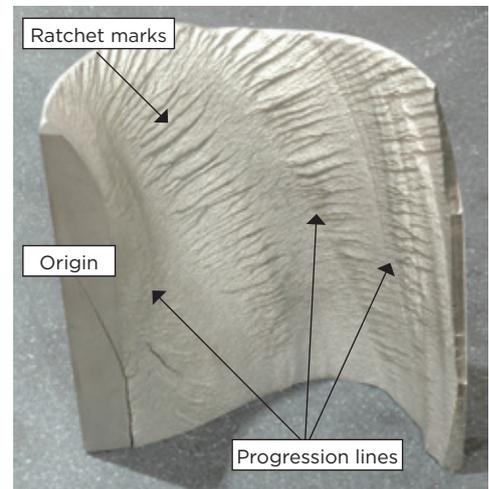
Torsional fatigue fracture of a shaft inside a hub that started at the keyway on the left-hand side and progressed around the shaft
